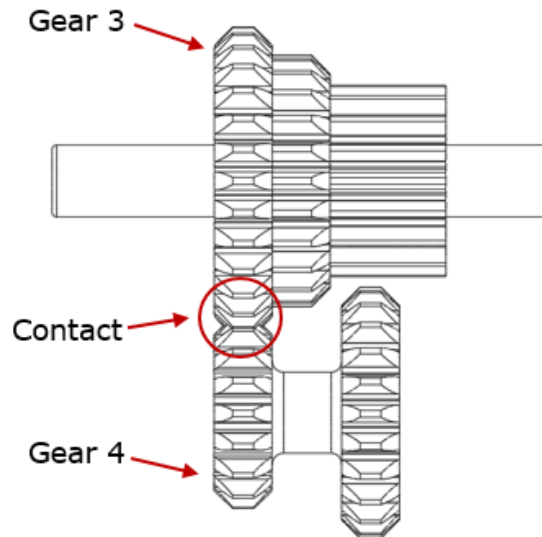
C Side View of Internal Gearing demonstrating contact between *Gear 3* and *Gear 4* as second position.
